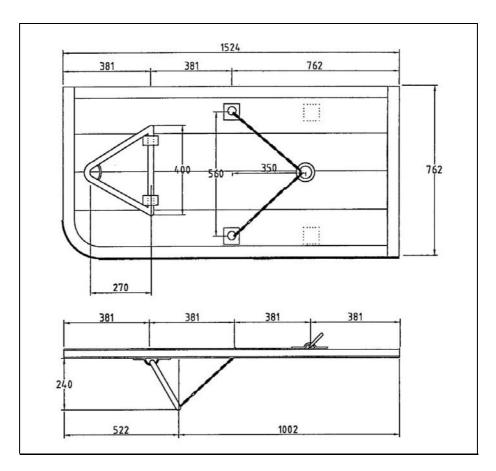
Design details of flat rectangular otter board of wood and steel construction (1524x762 mm; 75 kg)
